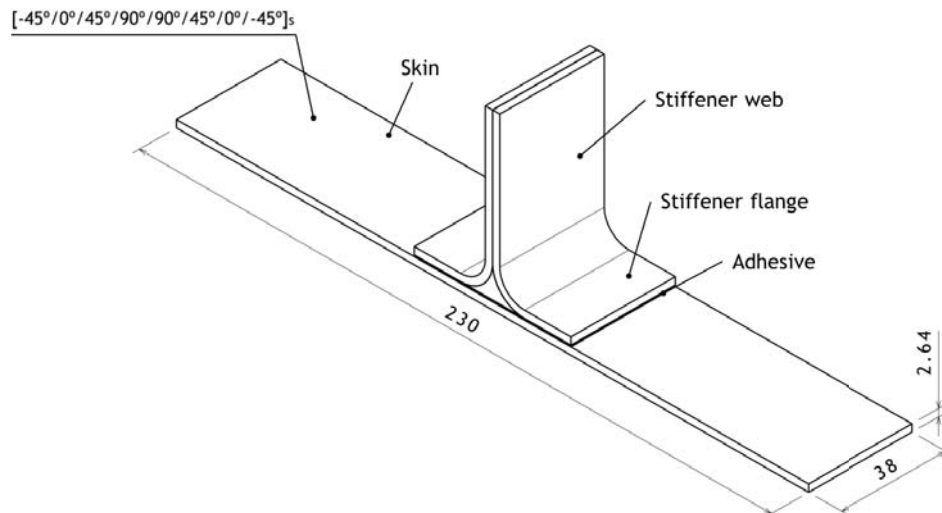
Bonded joint geometry and skin's dimensions (values in mm).
